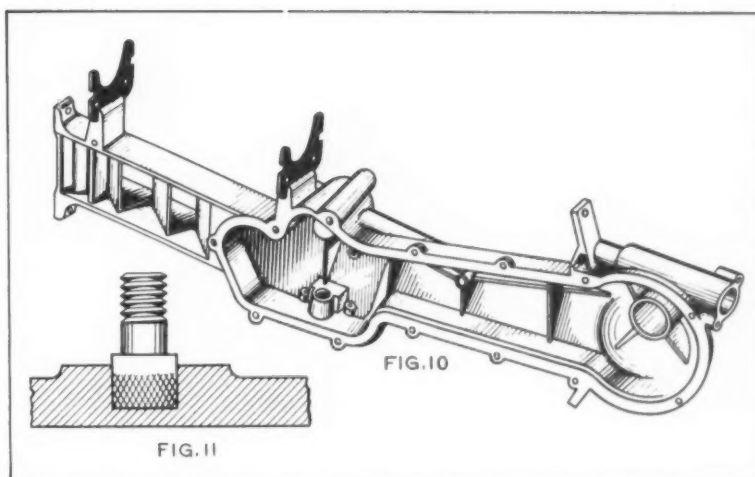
Gear-case for a Washing Machine Having Stamped Steel Supports (Shown in Black) Cast in Place. Fig. 11. Stud Insert with Head Forming a Step which Prevents Cast Metal from Entering the Thread
